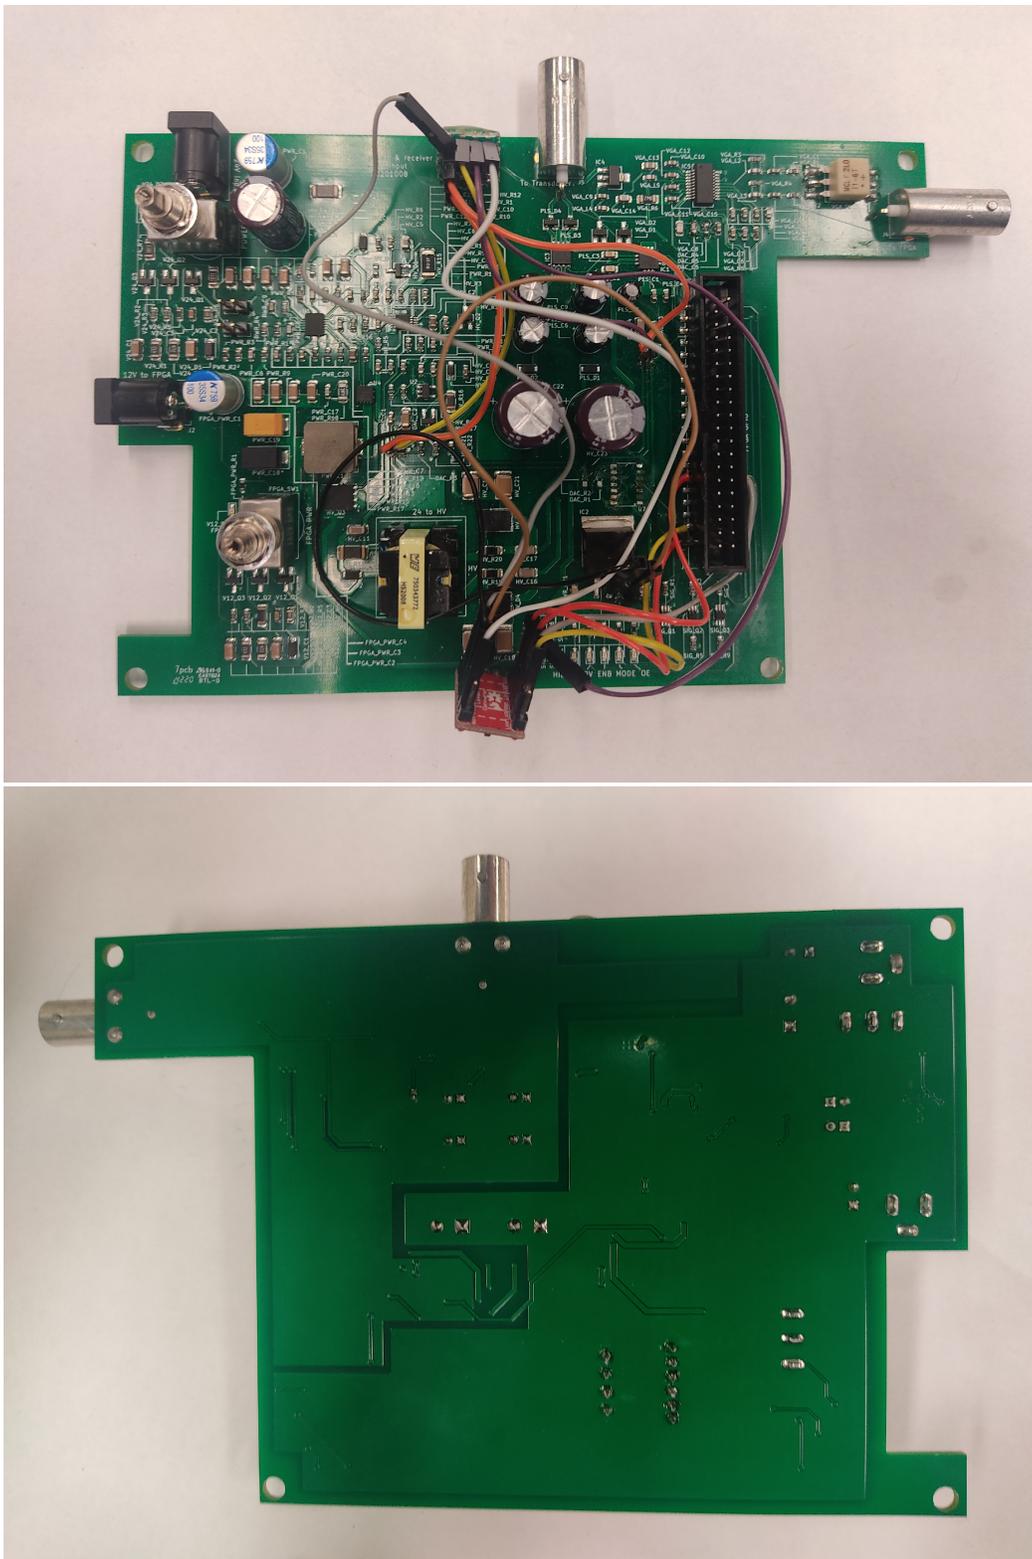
PCB manufactured by Bittele (a) Front View, (b) Bottom View
